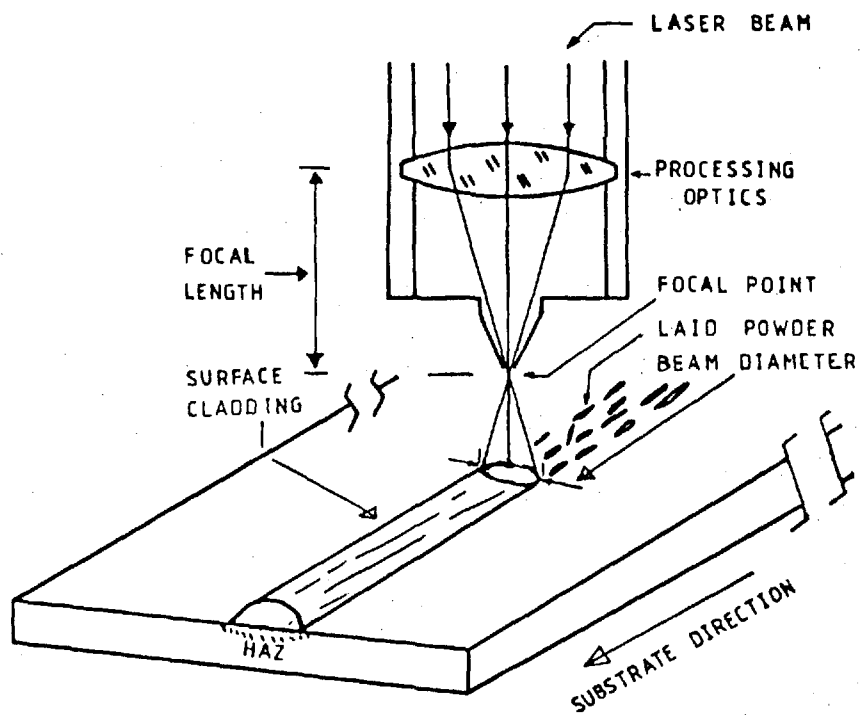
ARRANGEMENT OF THE APPARATUS FOR MAKING A SINGLE BEAD SURFACE CLADDING.
